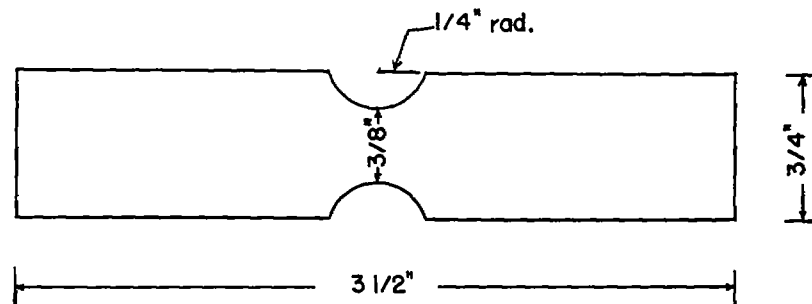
Dimensions of specimens used for both bending and torsion tests.
